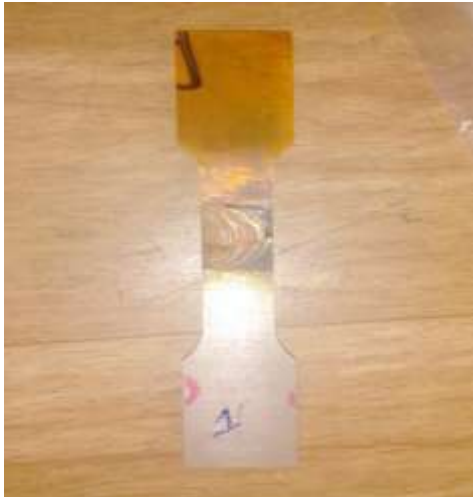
Specimen of butt joint when two plates joined will be joined by rubbing mix welding when apparatus moves along the middle line for Tensile Test
